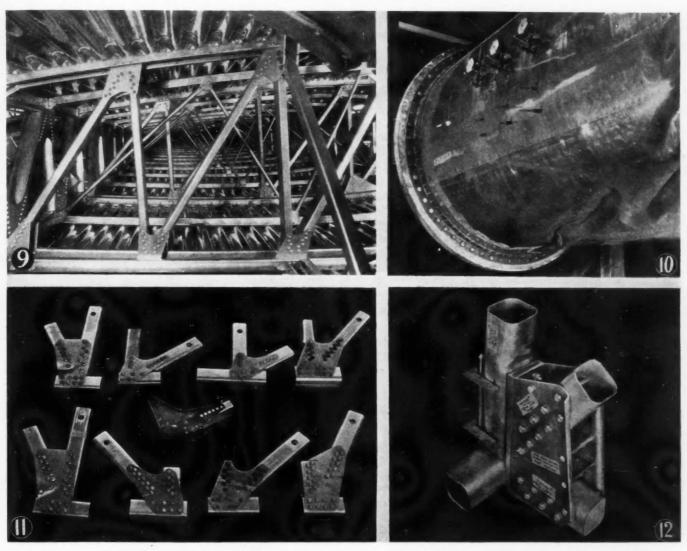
Typical Wing Construction Fig. 11-Gusset Test Specimens
